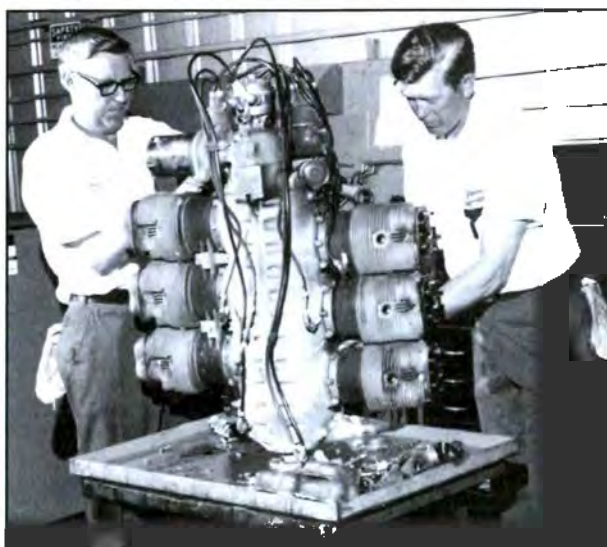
After being mounted on an engine stand, an engine is disassembled for a thorough visual inspection and cleaning.
